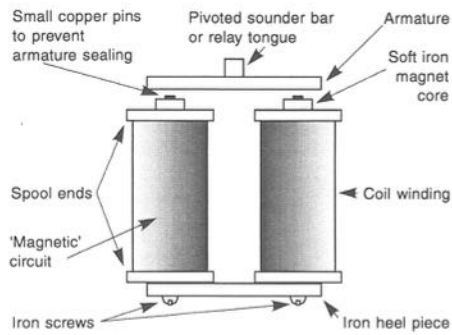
Typical coil assembly & nomenclature. In new instruments, mild steel may be used instead of iron
